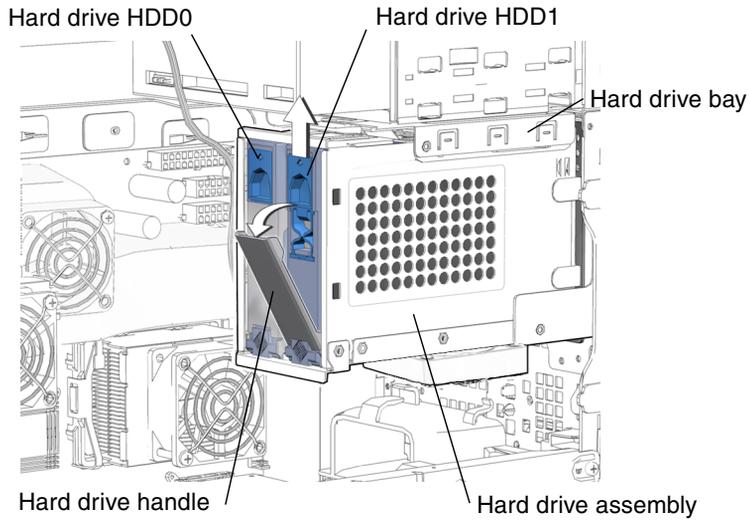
Releasing the Hard Drive From the Hard Drive Assembly
